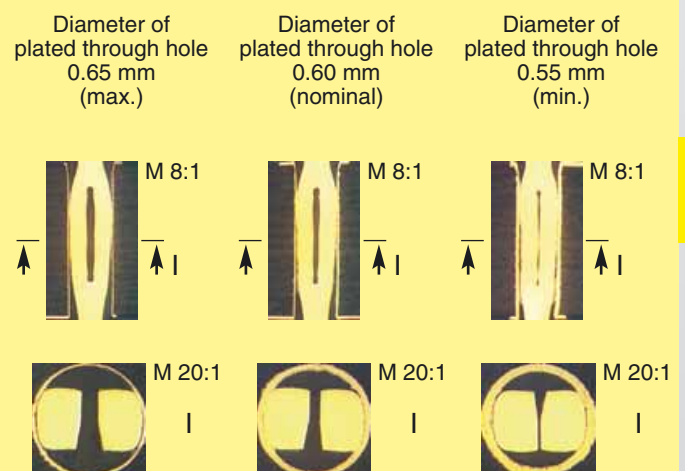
Cross section of a pcb 2.4 mm thick with various hole diameters
